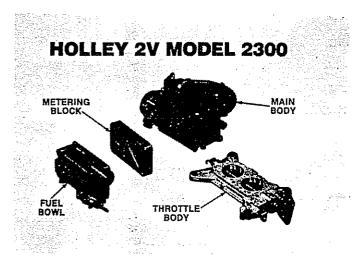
MODEL 2300-C TWO-BARREL CARBURETOR ASSEMBLIES
